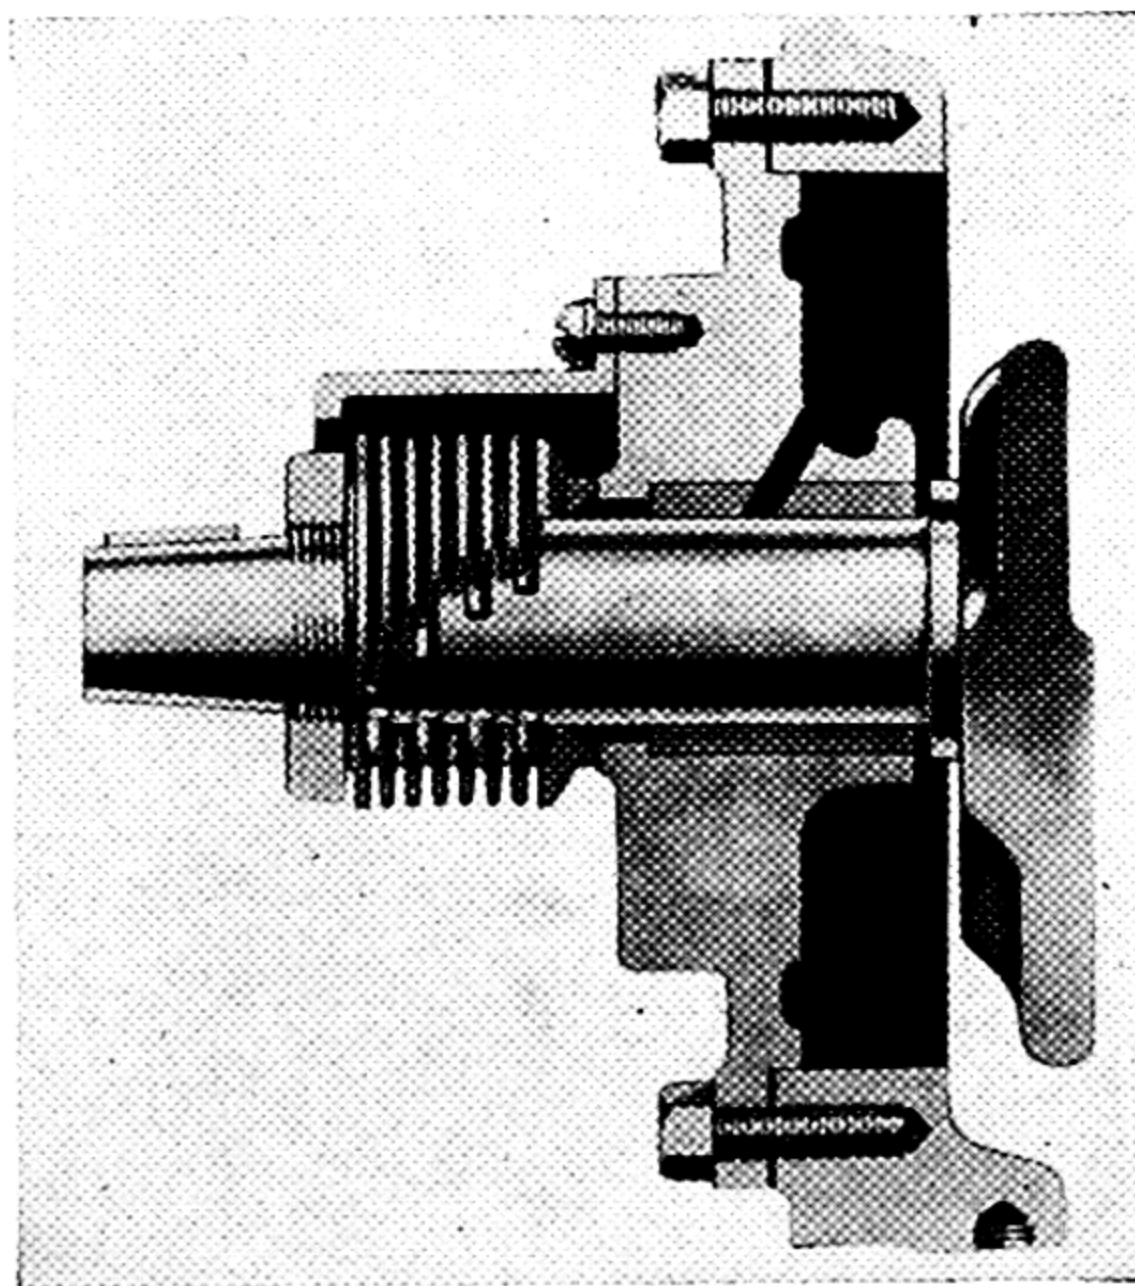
Bellows crankshaft seal. Courtesy Universal Cooler Division, International Detrola Corp.
